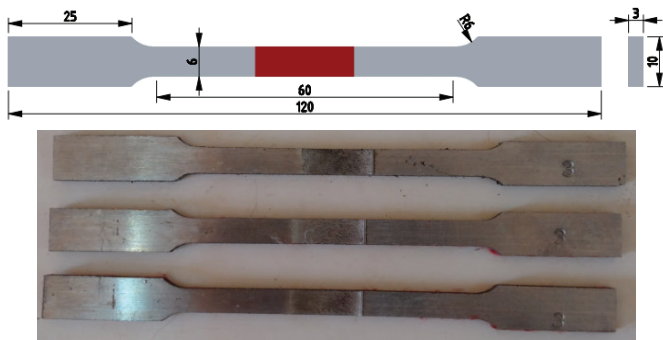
The geometry of the tensile specimen (ASTM E290), dimension in mm.
